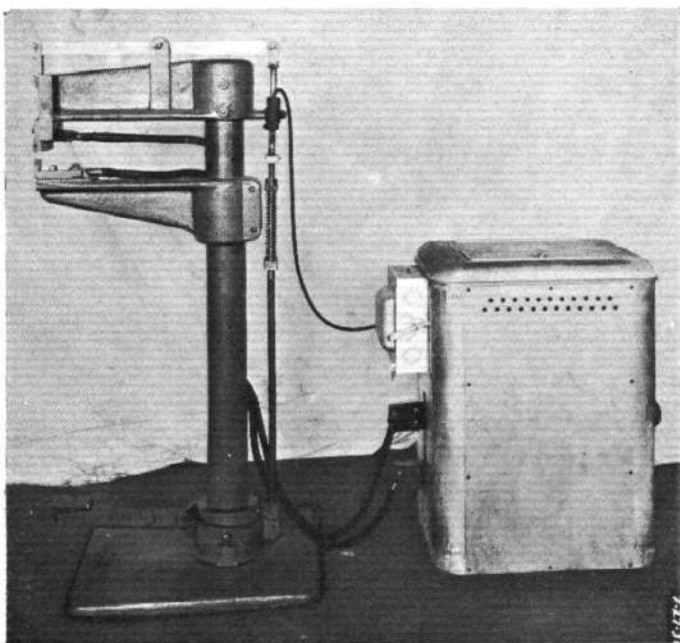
, THE SHOT WELDER : This photograph shows the complete equipment for runs on straight strip or other material that can be fed through a stationary machine.
